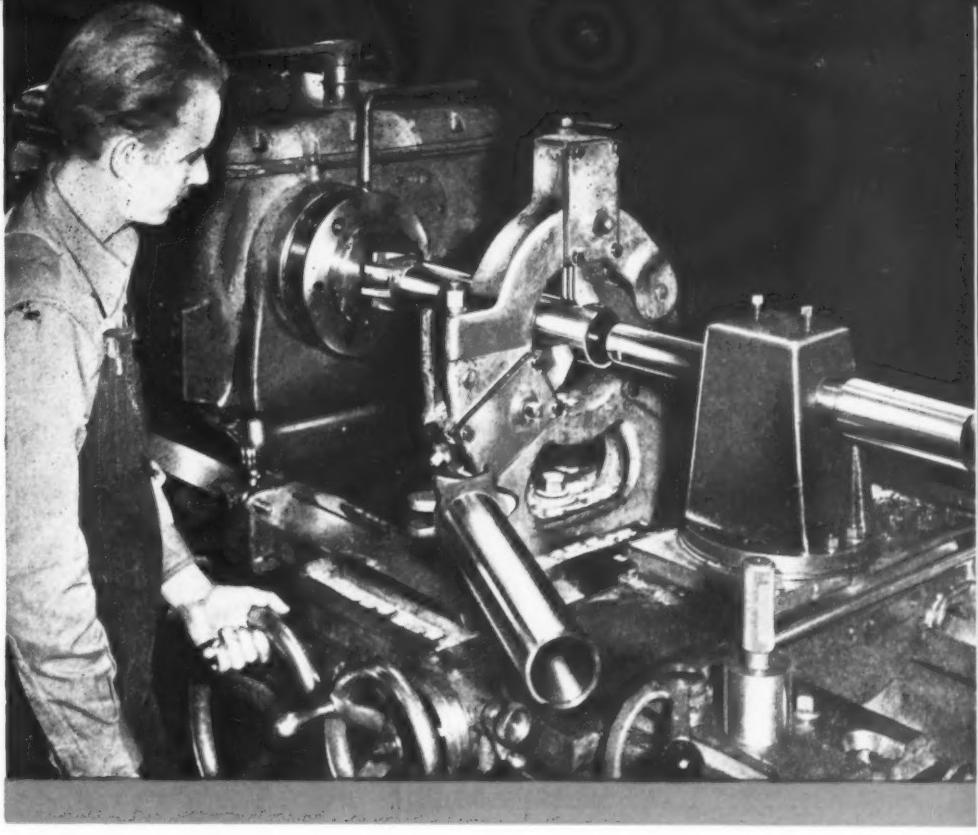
Finish-turning Tail-wheel Outer Assembly. One End is Mounted on an Expansion Mandrel and the Other End Backed up by a Ball-bearing Tailstock Center
